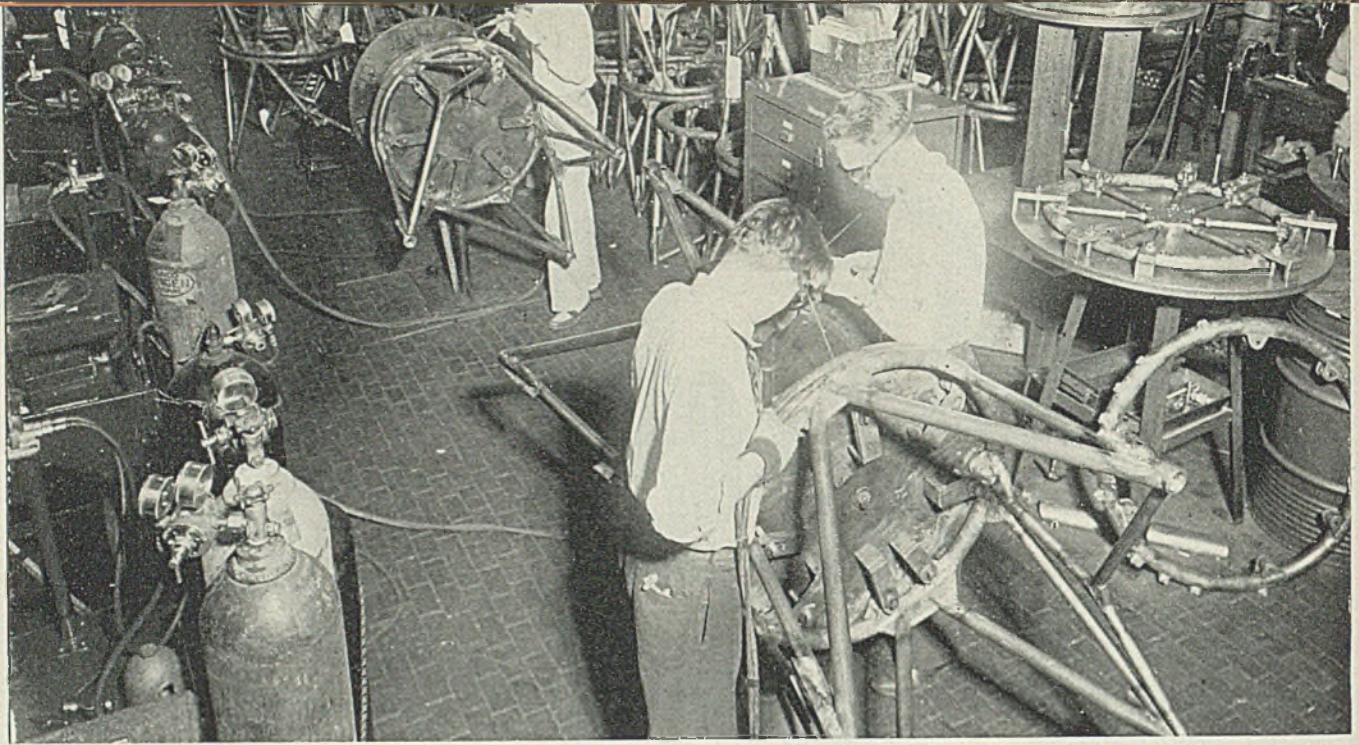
A Harrison rotating jig for welding engine mounts at the Glenn L. Martin Co. plant, Baltimore. Two operators work on separate mounts, both of which are supported from a single floor stand. Note jig head at extreme right with parts clamped into place ready for welding
